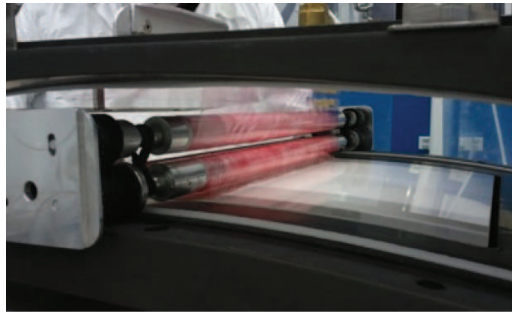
The peeling machine is inserted between the mould (bottom surface) and the glass (top surface) to remove the dust trapped in the paint film. This procedure is done just before drawing the glass in contact with the mould
